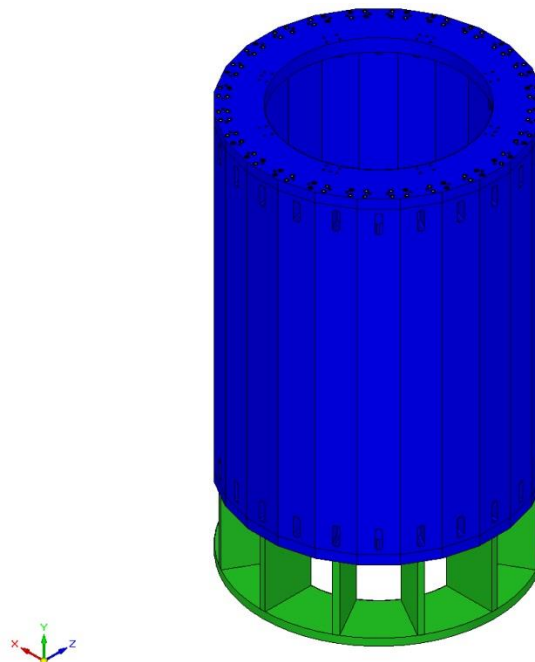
Yoke barrel assembled in the vertical position
